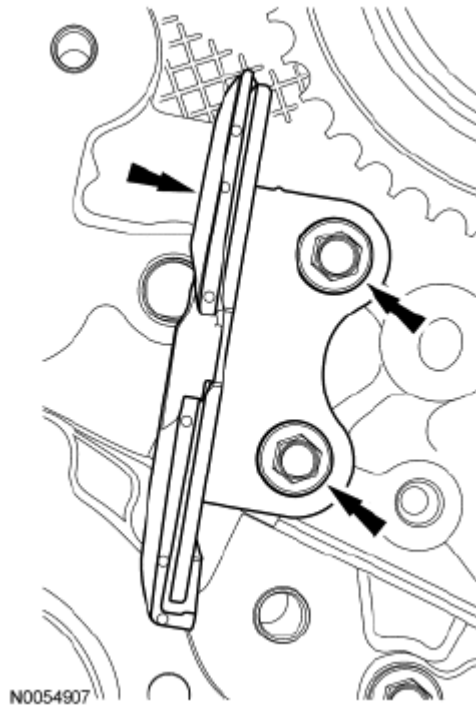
Locating Upper LH Primary Timing Chain Guide And Mounting Bolts
